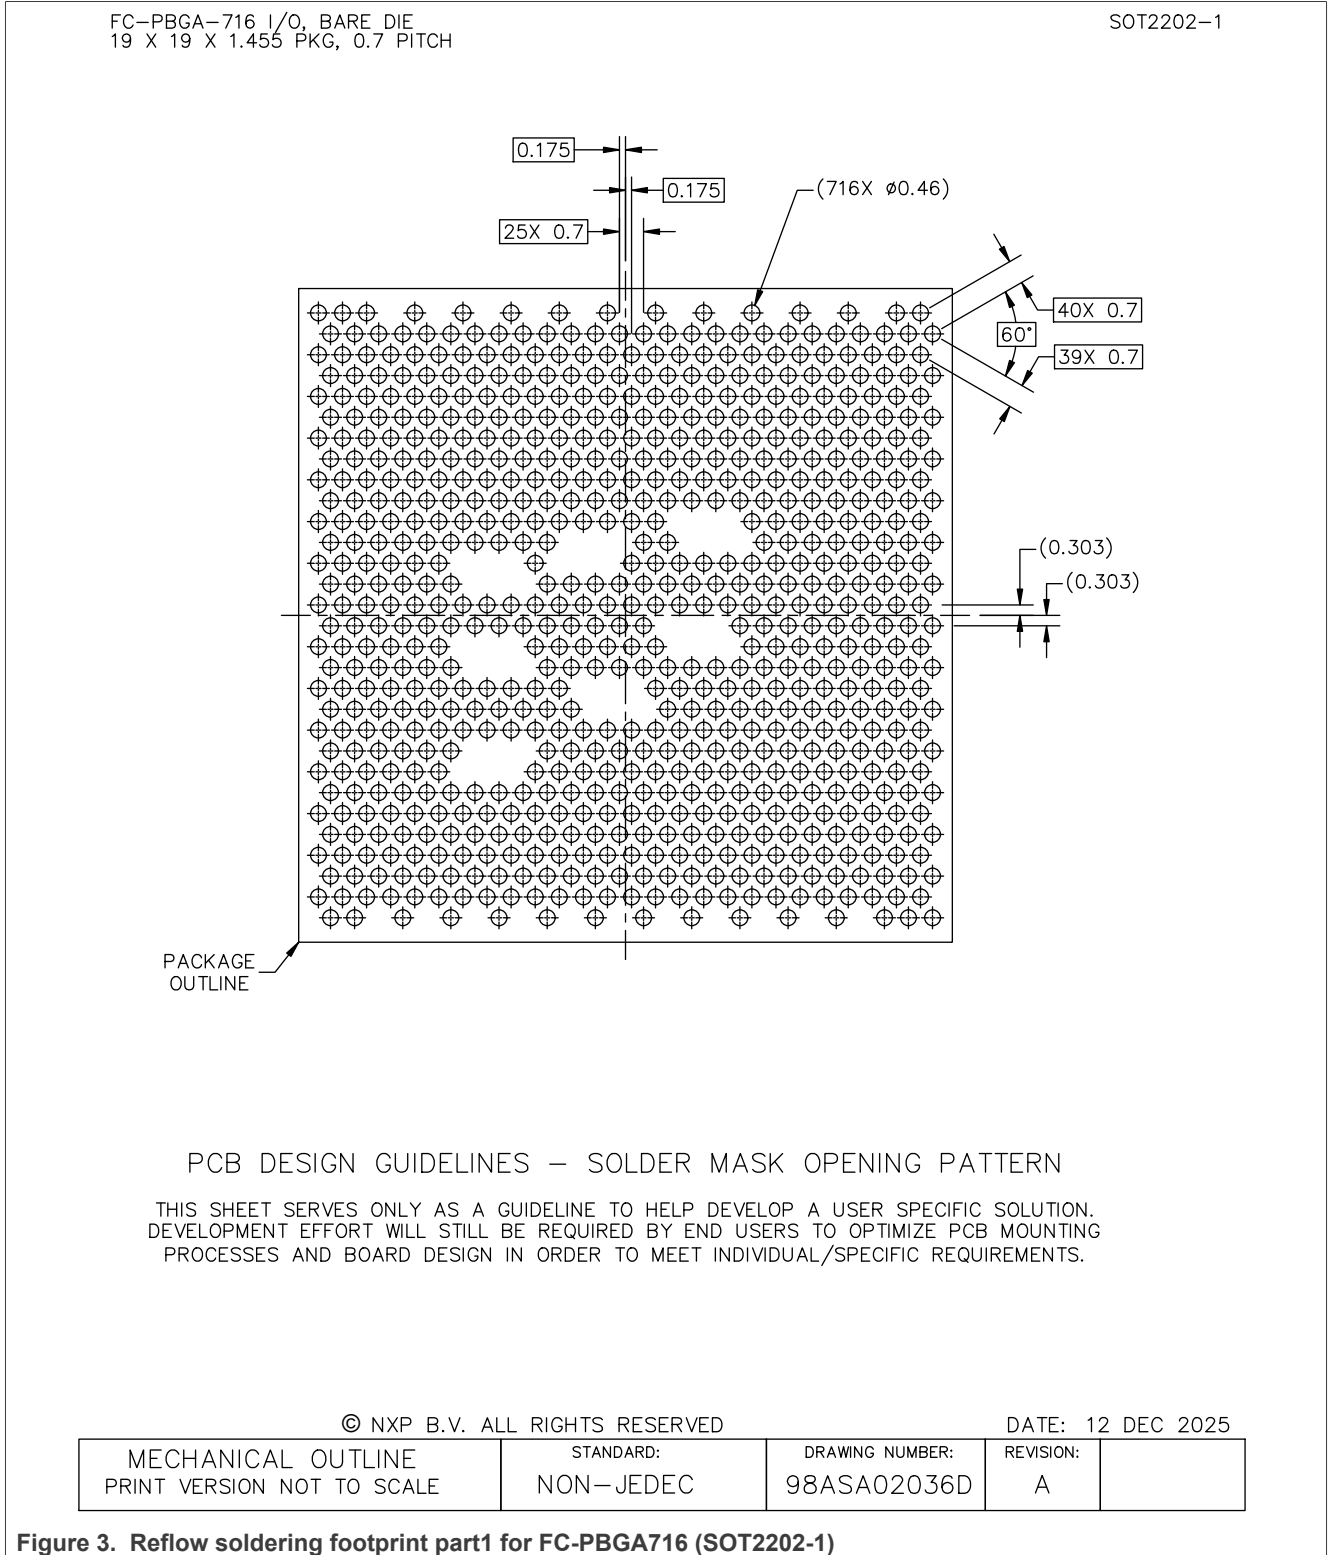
Reflow soldering footprint part1 for FC-PBGA716 (SOT2202-1)
